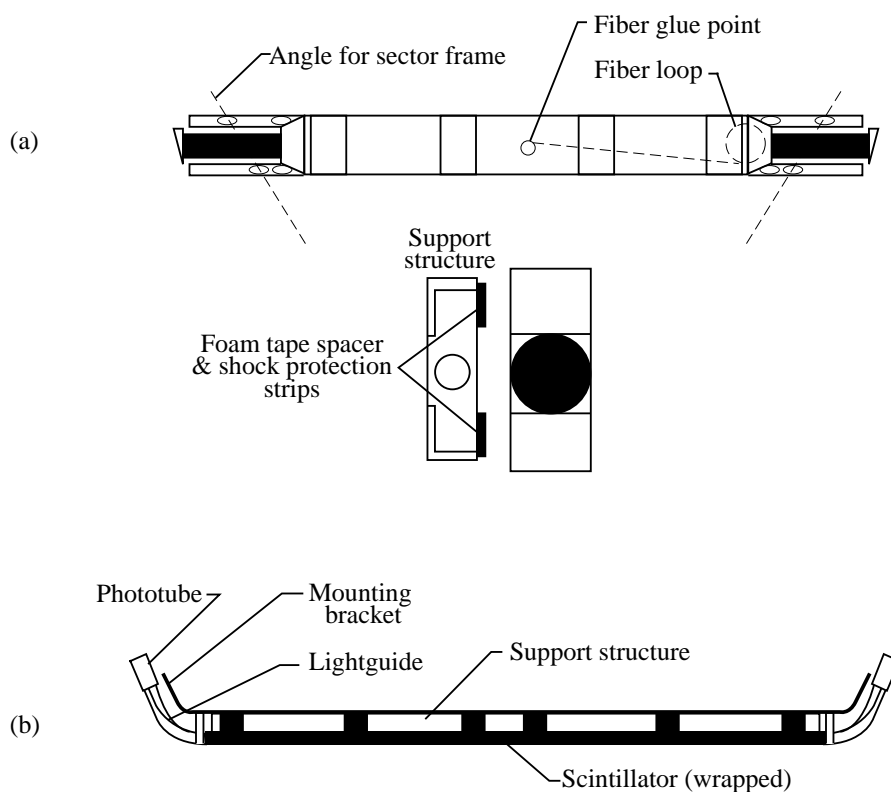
Counter and support assembly. a) Top view and enlarged end view of the panel-1a and panel-2 assemblies. b) Side view of the panel-2 mounting assembly.
